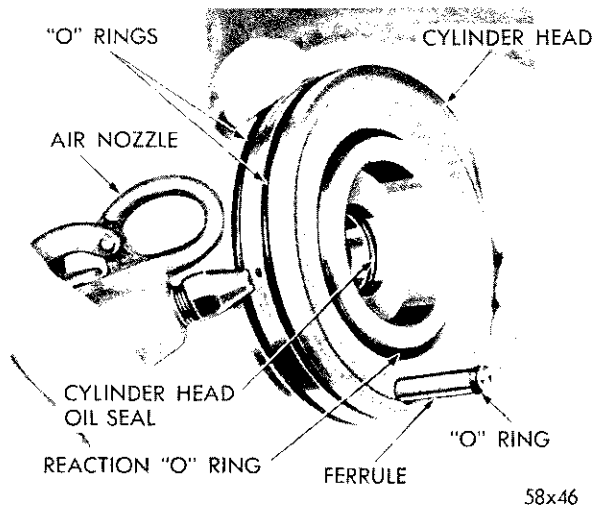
Removing Reaction Ring Seal from Cylinder Head
